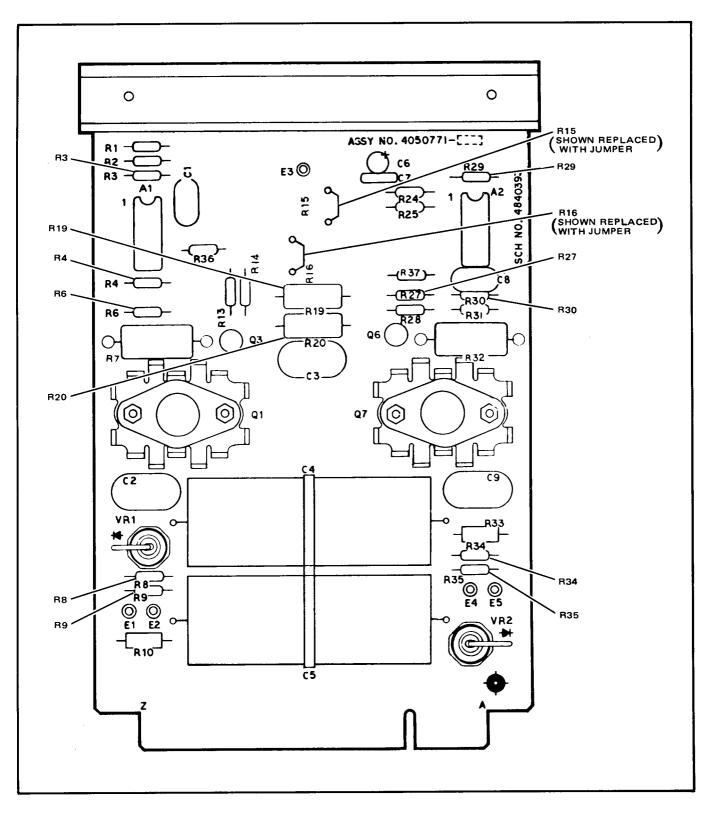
Motor Drive Amplifier PWA Parts Location
